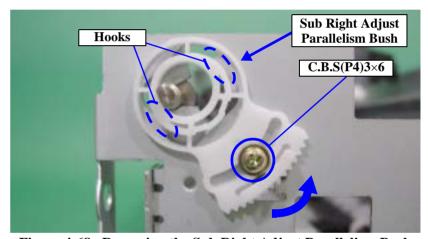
Removing the Sub Right Adjust Parallelism Bush
